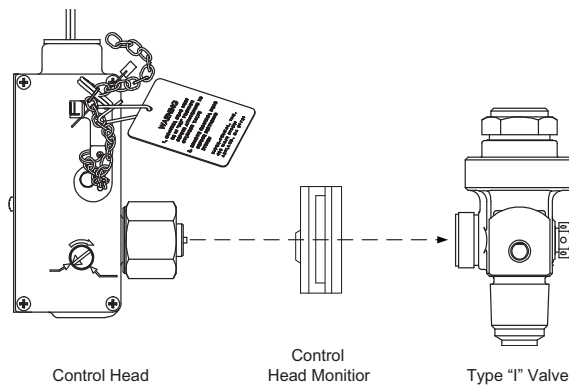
Control Head and Placements Supervision Component Installation to Type "I" Valve, Side View
